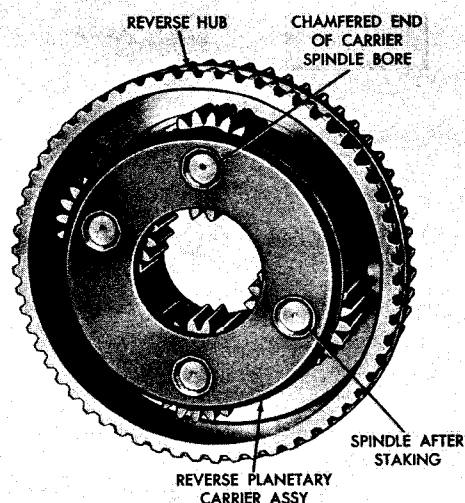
Reverse-range planetary carrier and hub assembly
